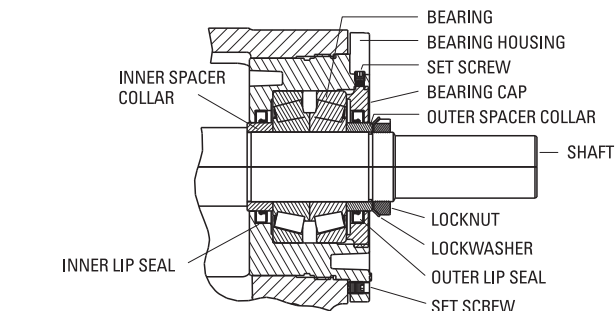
THROUGH G1-222 BEARING HOUSING ASSEMBLY
